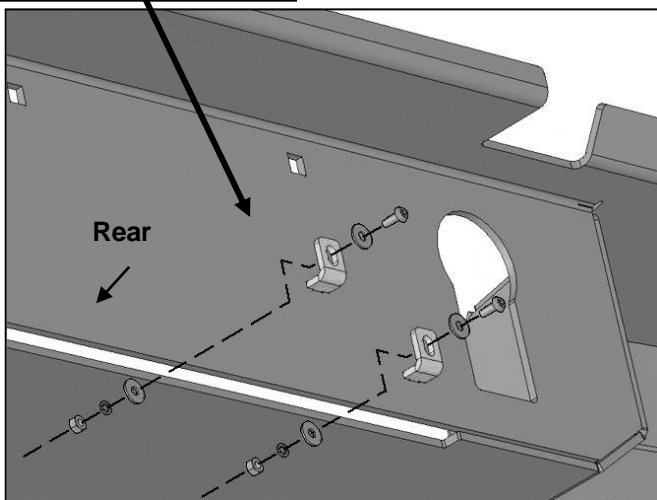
Unplug and remove the factory sensors and wiring harness. Note location of each sensor for proper reinstallation
